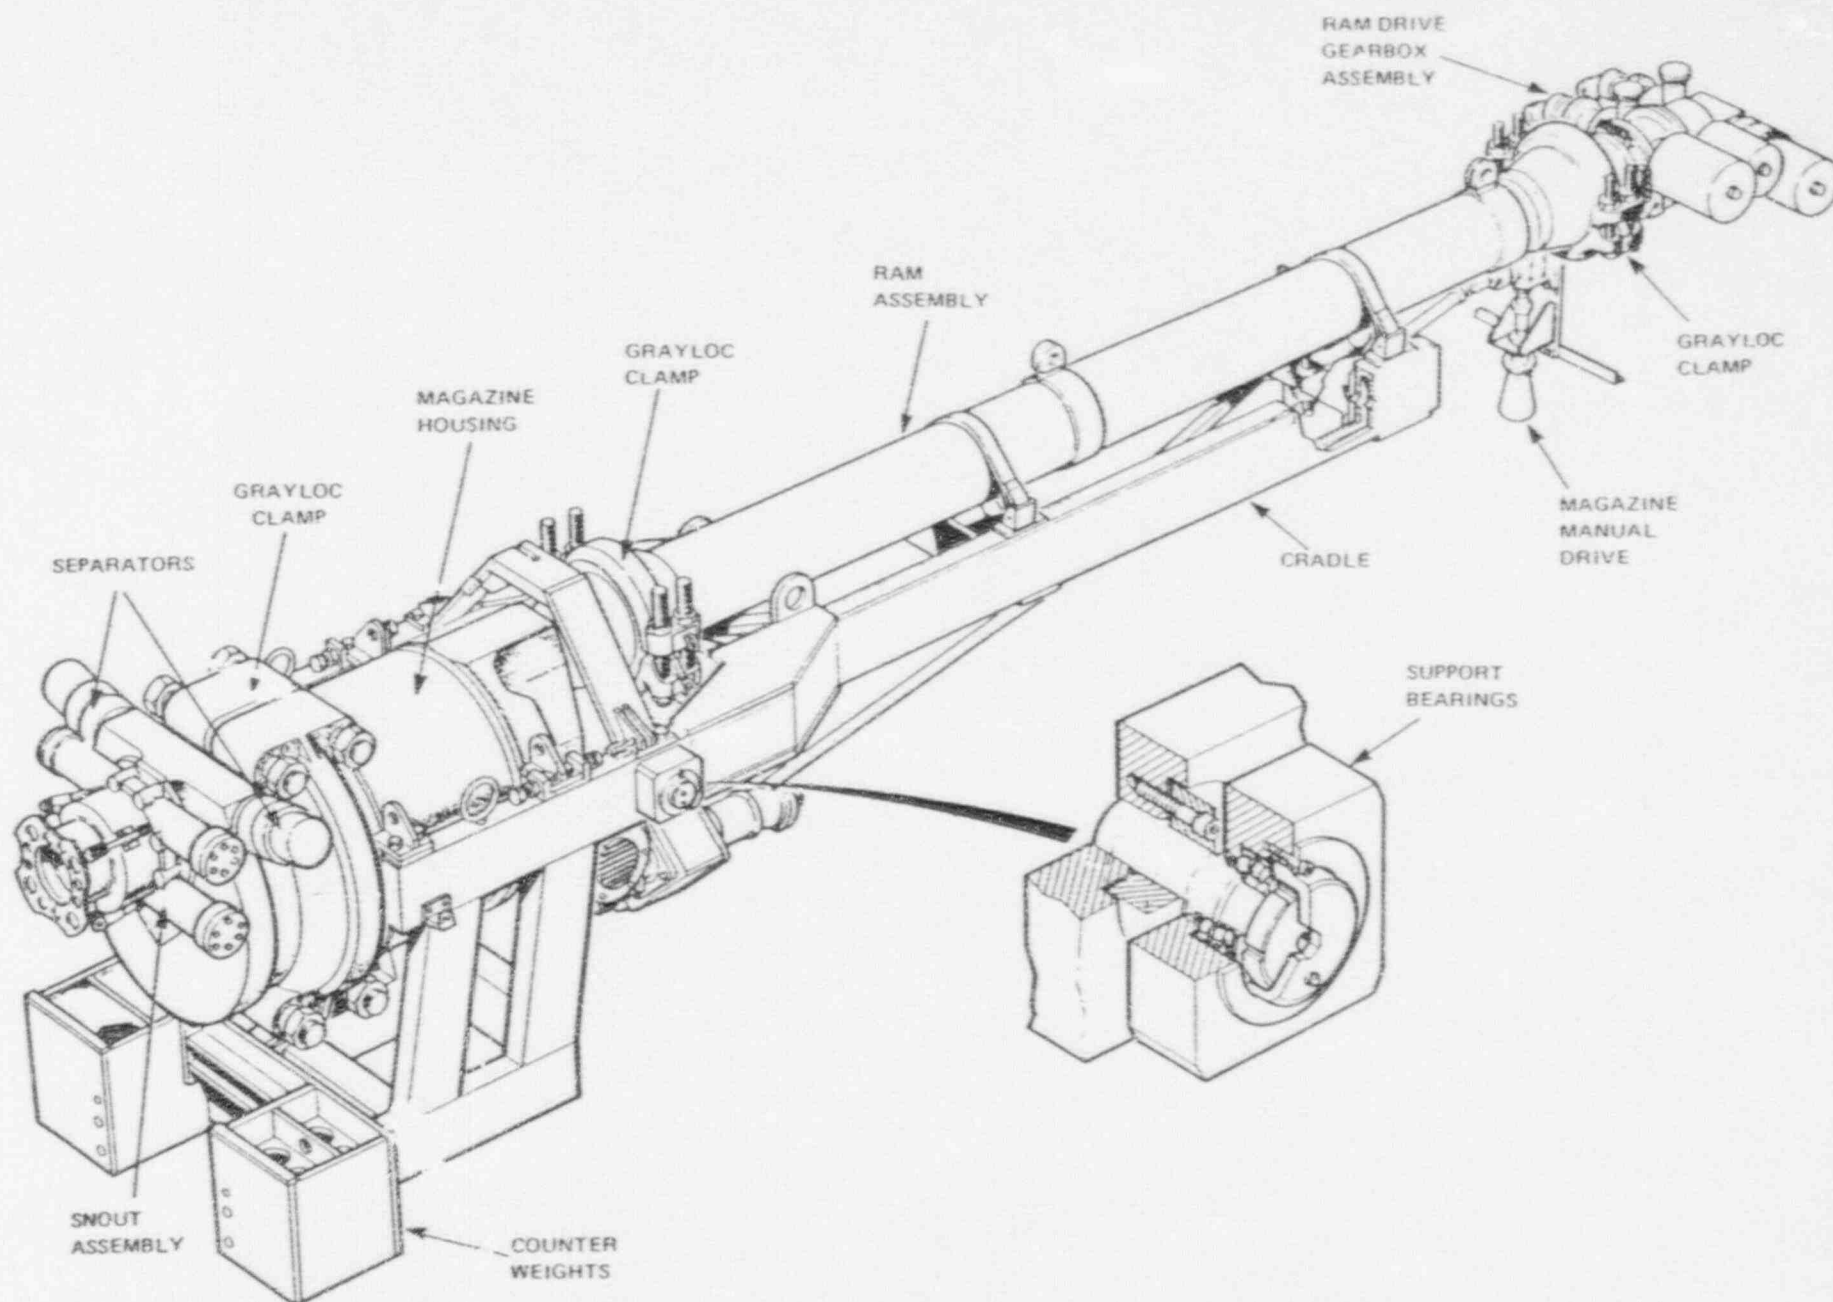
FUELING MACHINE HEAD AND SUPPORT CRADLE ASSEMBLY
